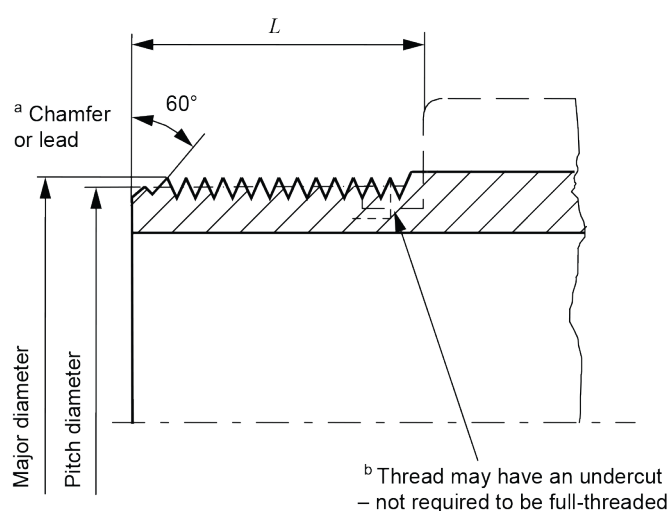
Basic dimensions of internal straight pipe threads for conduit fittings having short threads on bushings or hubs for use with EHDERS conduit or electrical equipment having tapered or straight threads
